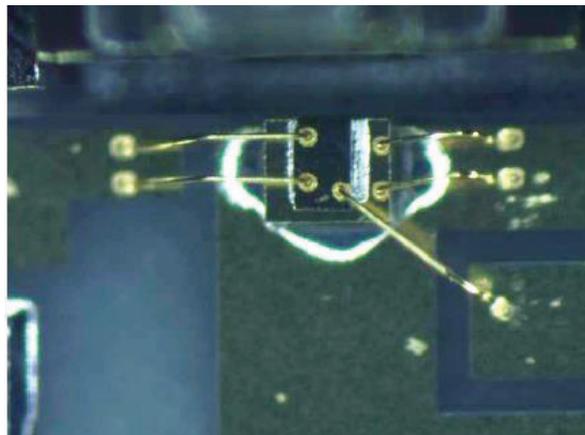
Picture from LDM 67536A09 from internal visual inspection.
